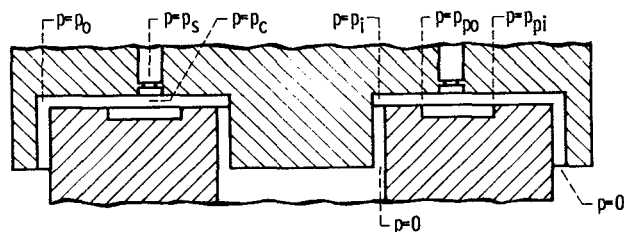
Series-hybrid rolling-element bearing including pressurized thrust bearing.
